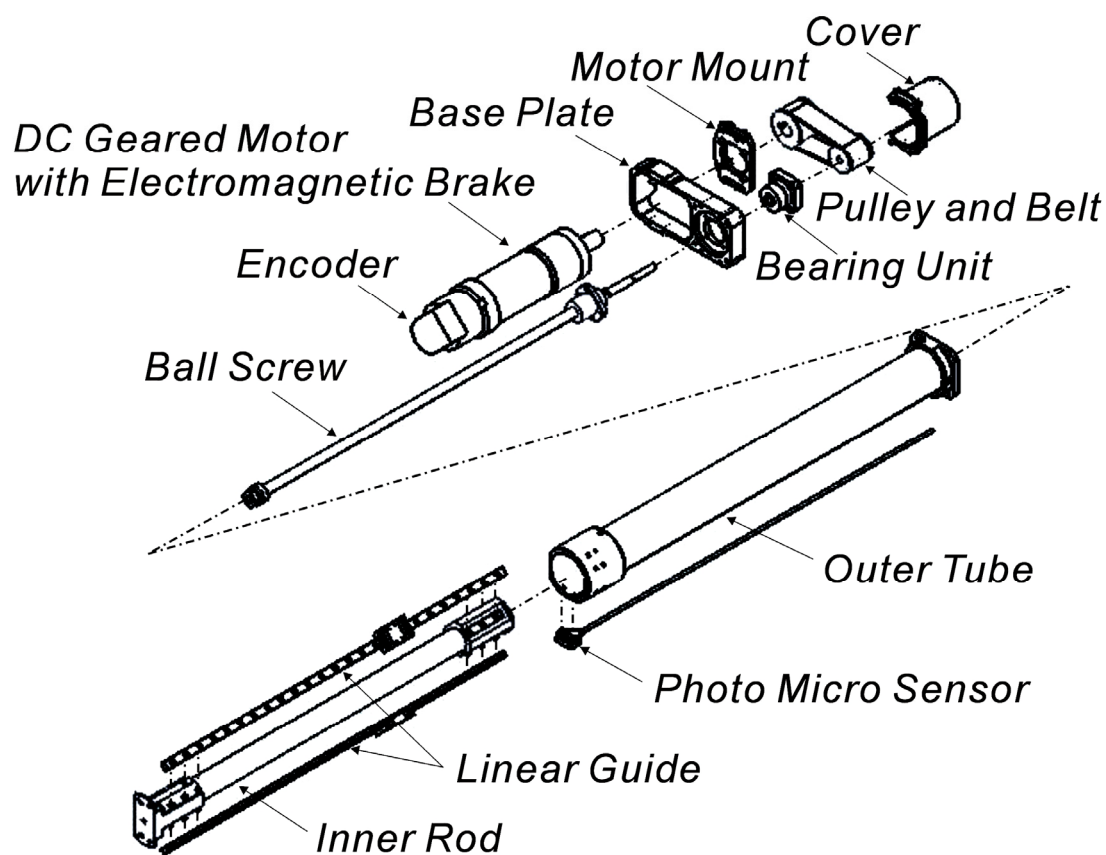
Exploded view of linear actuator developed for WL-16.
